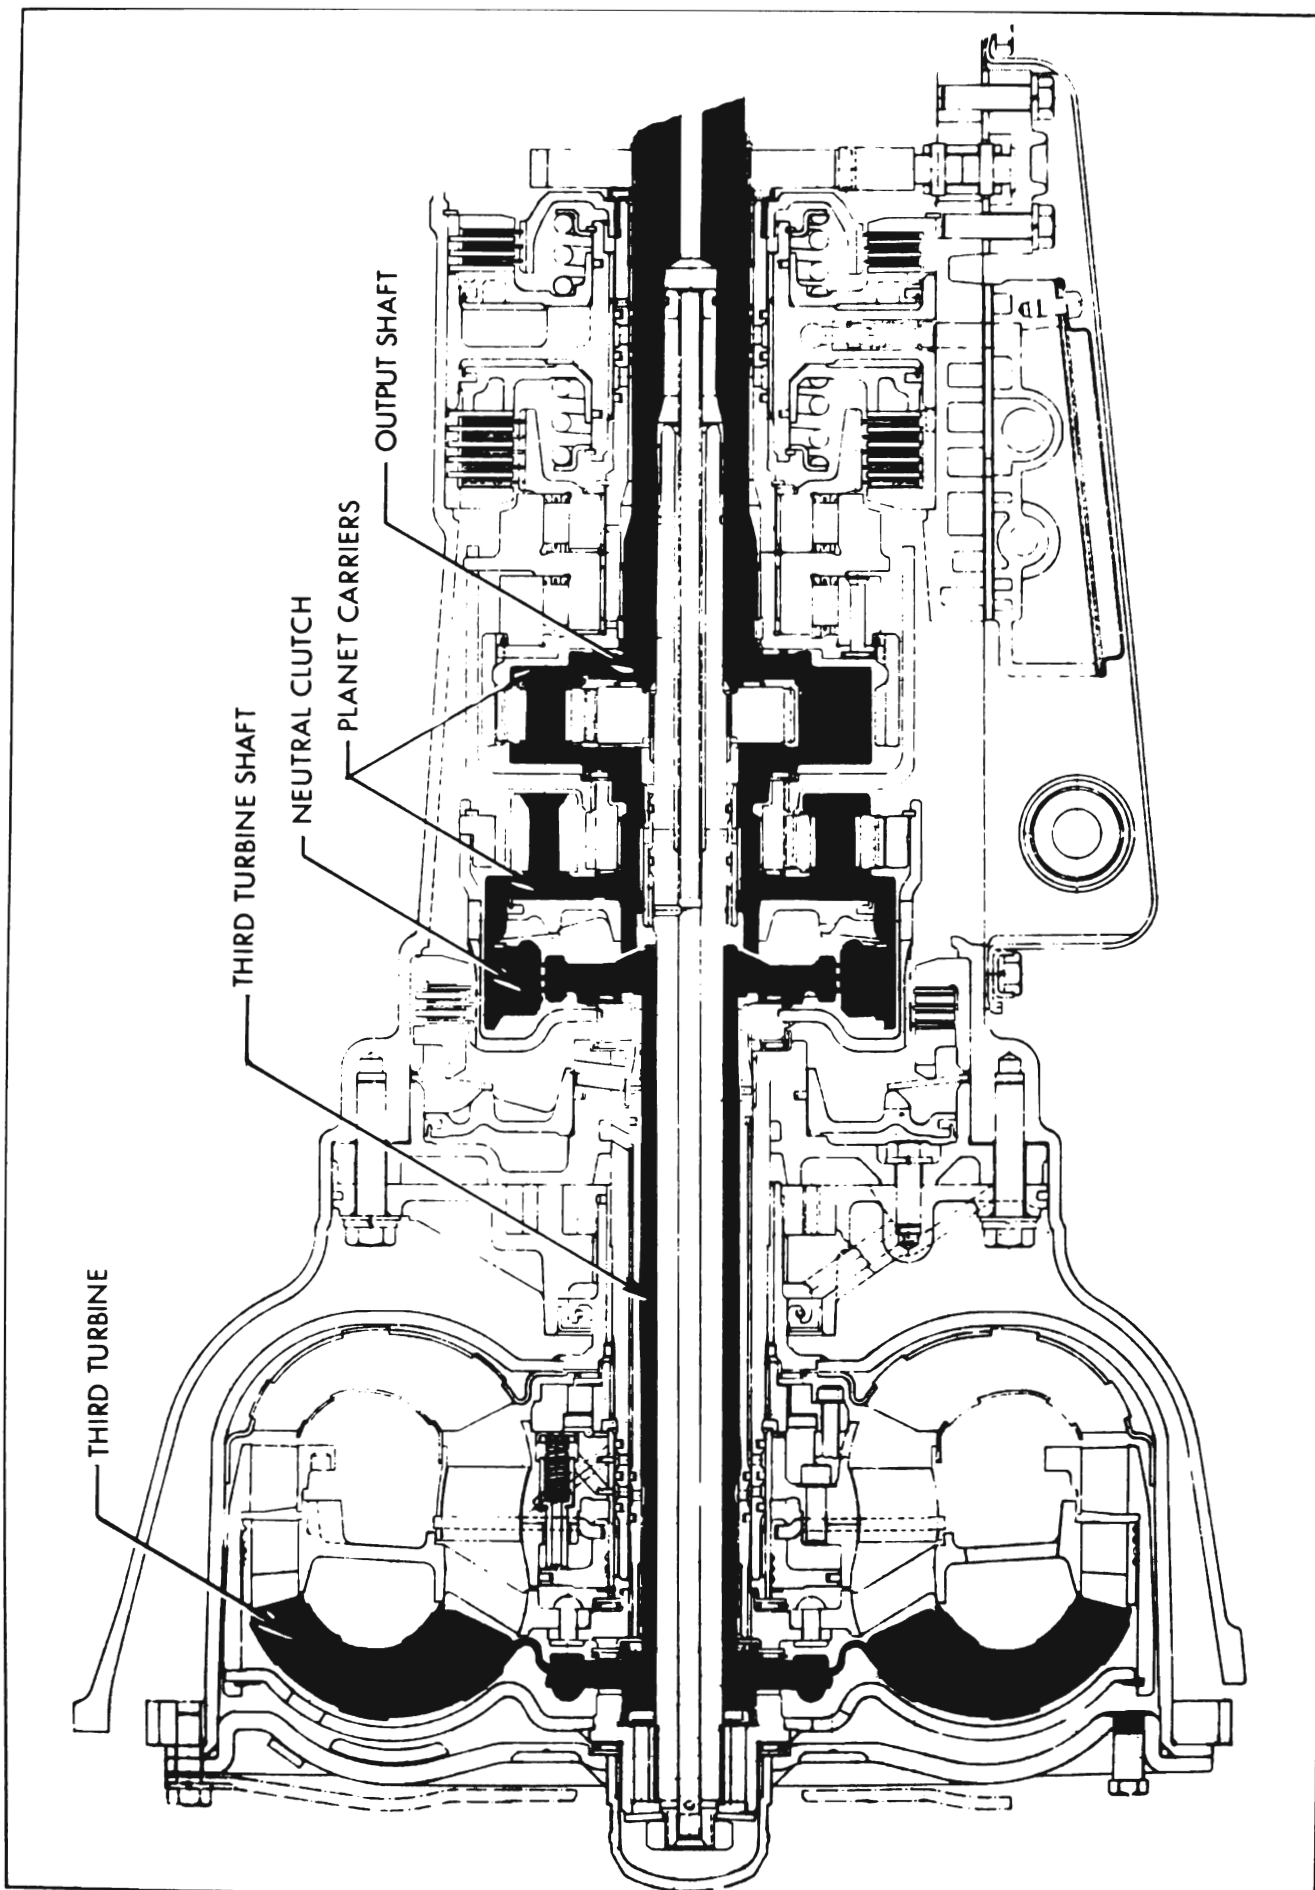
Third Turbine, Third Turbine Shaft, Neutral Clutch Planet Carriers, and Output Shaft
